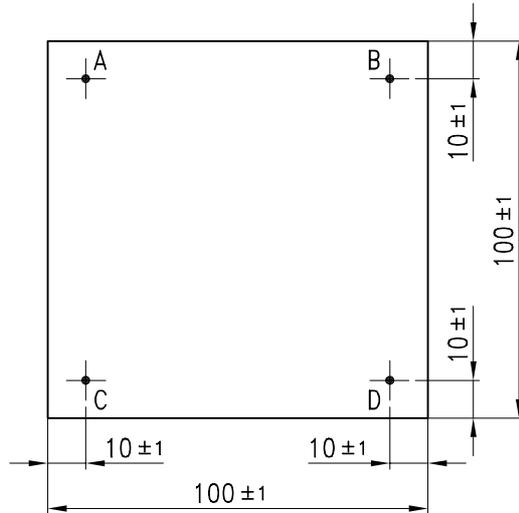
Location of measurement reference points on a test piece (all dimensions in millimetres ± 1 mm)
